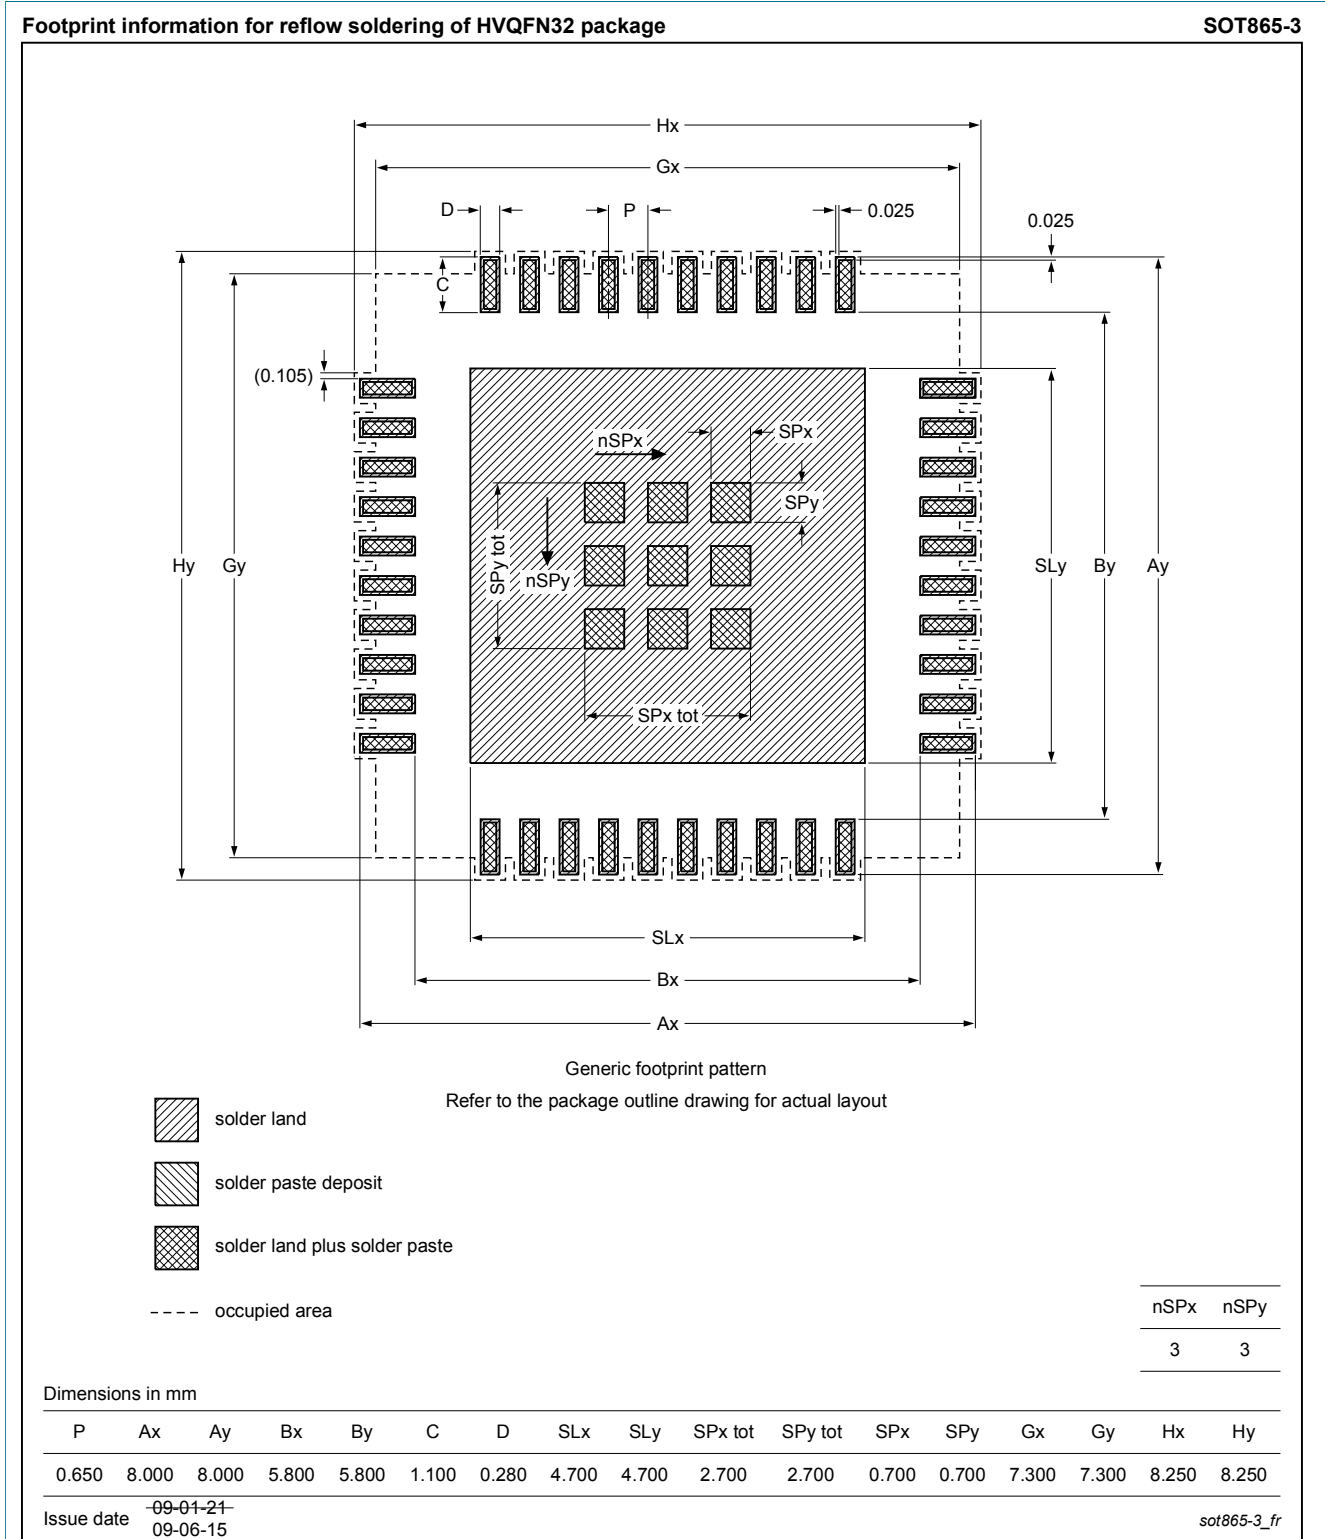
Reflow soldering footprint for HVQFN32 (SOT865-3)
